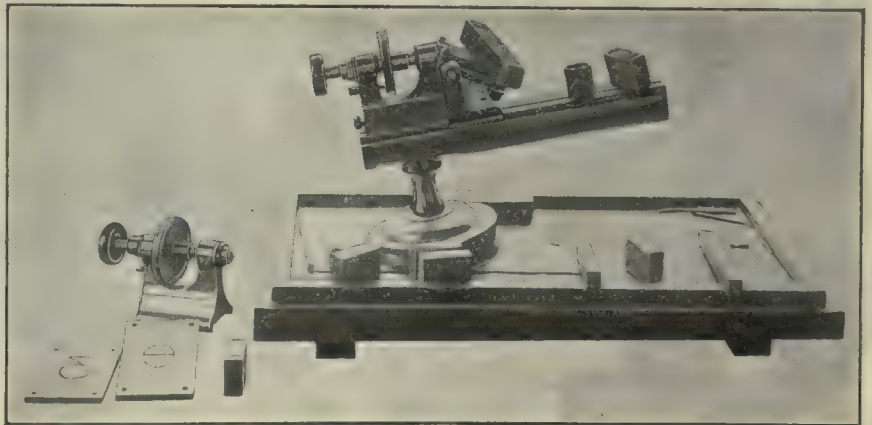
THE ENGRAVING TOOLS FOR THE DIE BLOCKS
